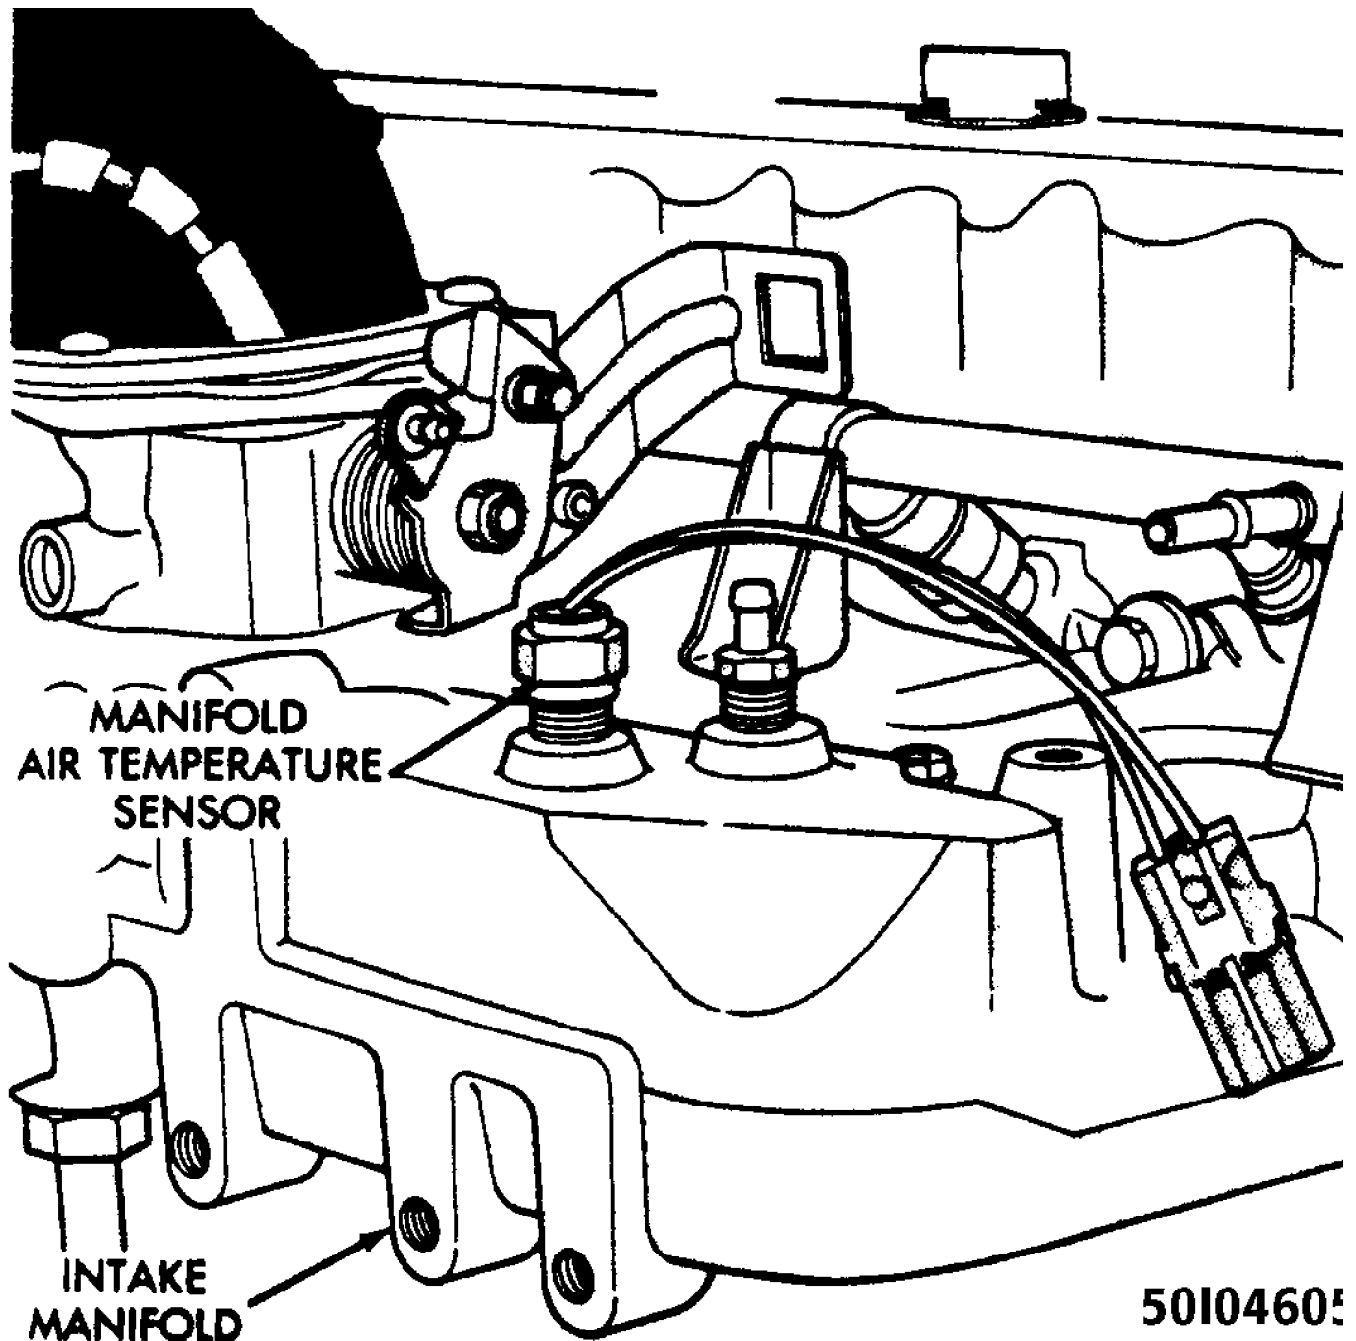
Manifold Air Temperature (MAT) Sensor Connectors
